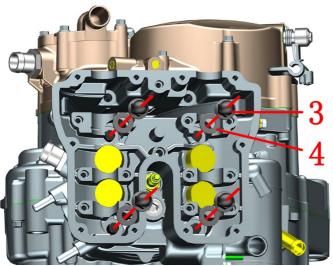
CYLINDER HEAD		Cylinder head assembly-1	СНК	0
